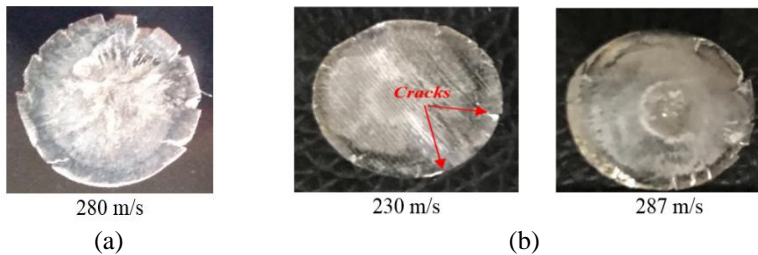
Photographs of deformed footprint for tensile splitting fracture mode; (a) reinforced recycled AA6061, and (b) recycled AA6061 T5 [25]
